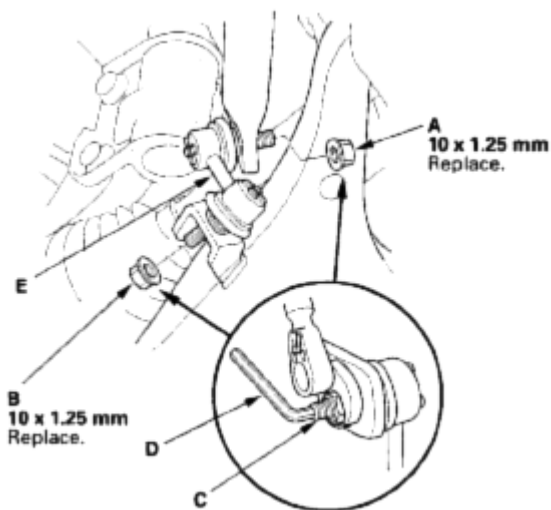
Identifying Self-Locking Nut And Flange Nut
